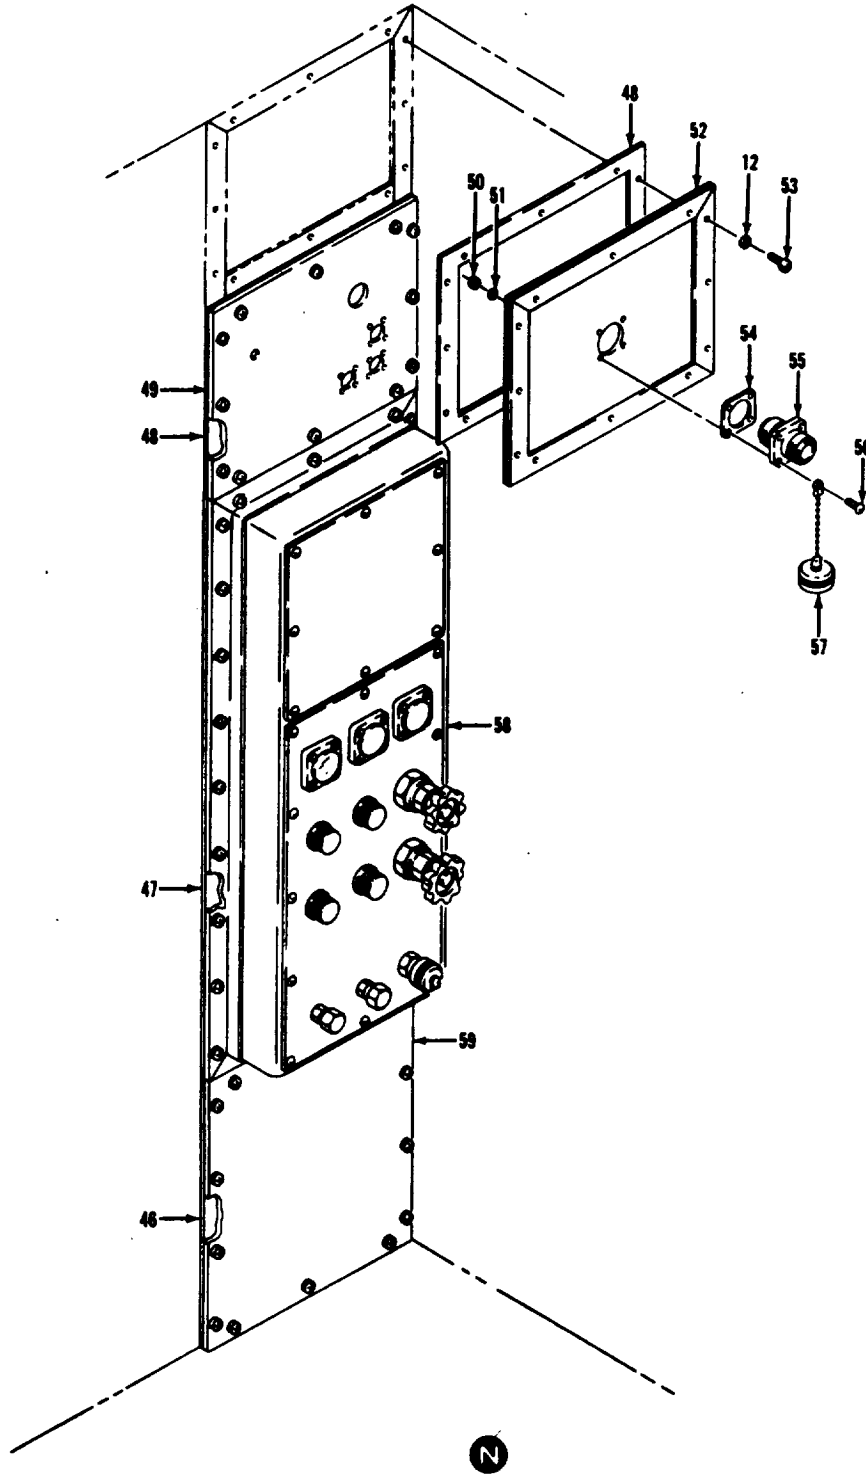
Electrical Equipment Installation (Sheet 6 of 19)
